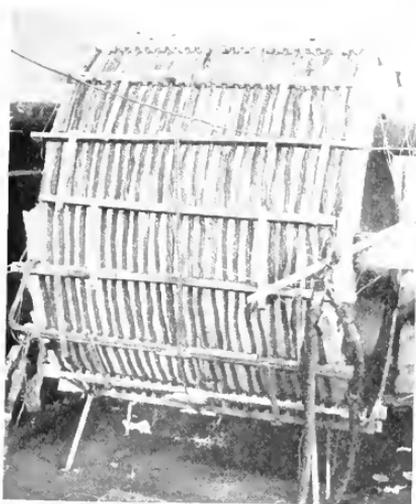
Rotor Spider Wound to be Heated Electrically by Induction. Primary winding consists of 26 turns of 250,000 cir. mil bare copper cable wound circumferentially
